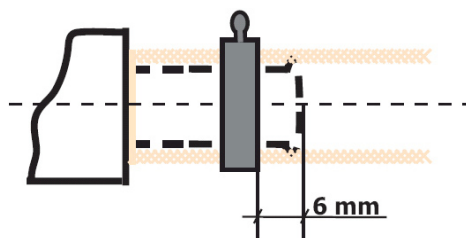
shows the assembly position of the clamp on the plastic connector of the multi-way valve.
